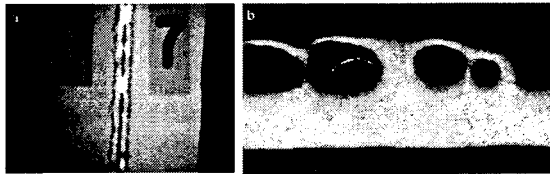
X-ray radiograph(a) and longitudinal cross section of Zn coated steel laser weld(b) showing large blow holes in the weldmetal.
